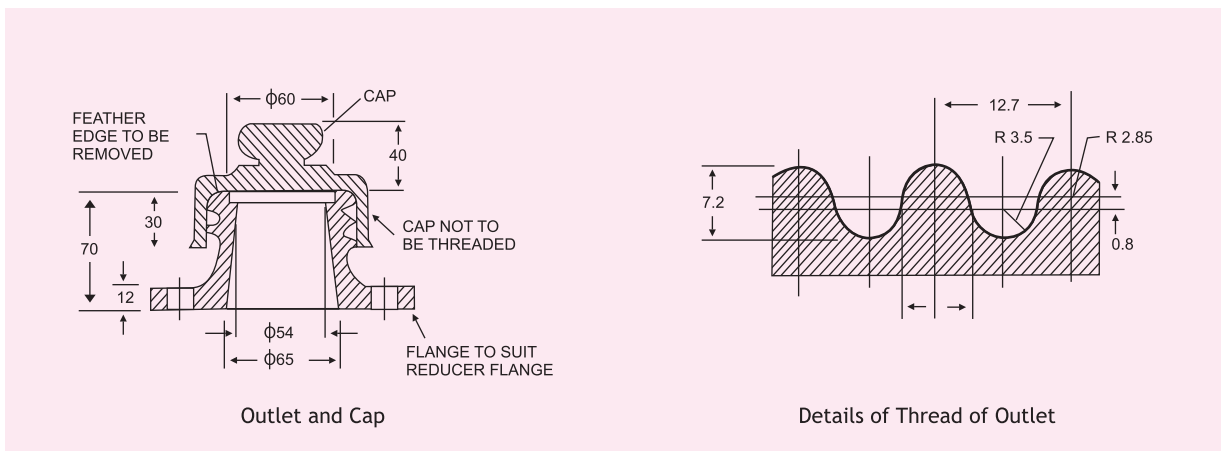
Screwed Outlet and Cap (Round Thread)
